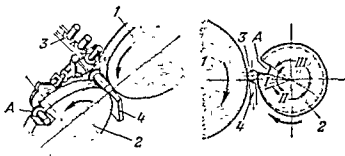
Automatic infeed centreless grinding with the infeed motion provided by the profile of the regulating wheel
